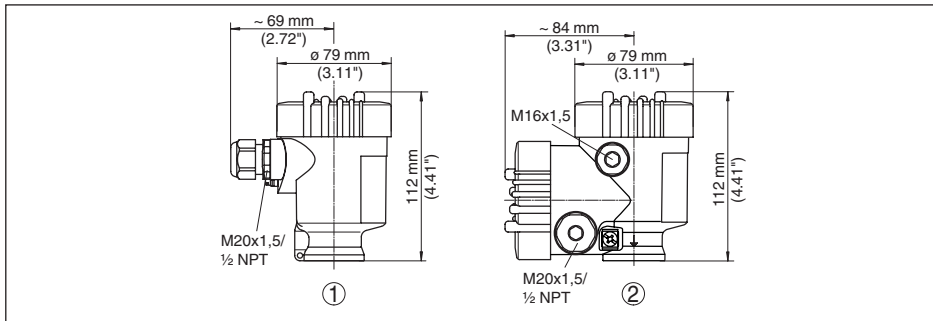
Housing versions in protection IP 66/IP 68 (0.2 bar) - with integrated display and adjustment module the housing is 9 mm/0.35 in higher
